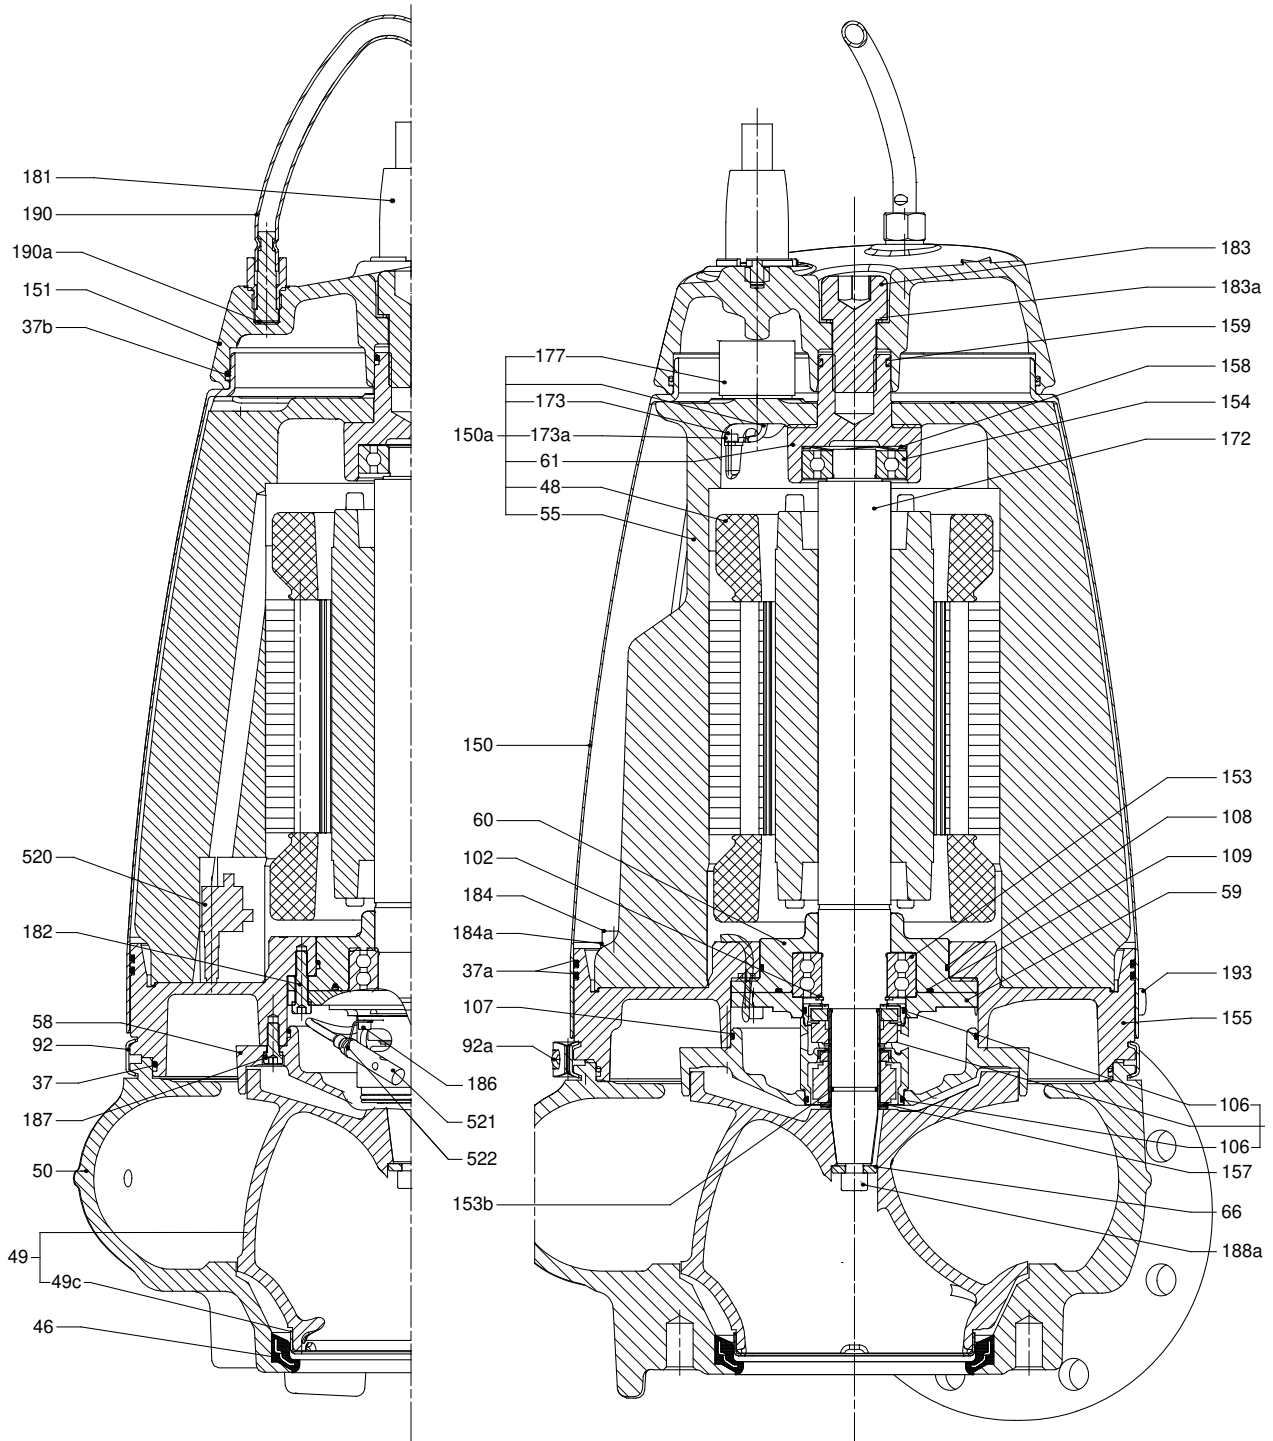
Exploded view, SE1 pump with S-tube® impeller
